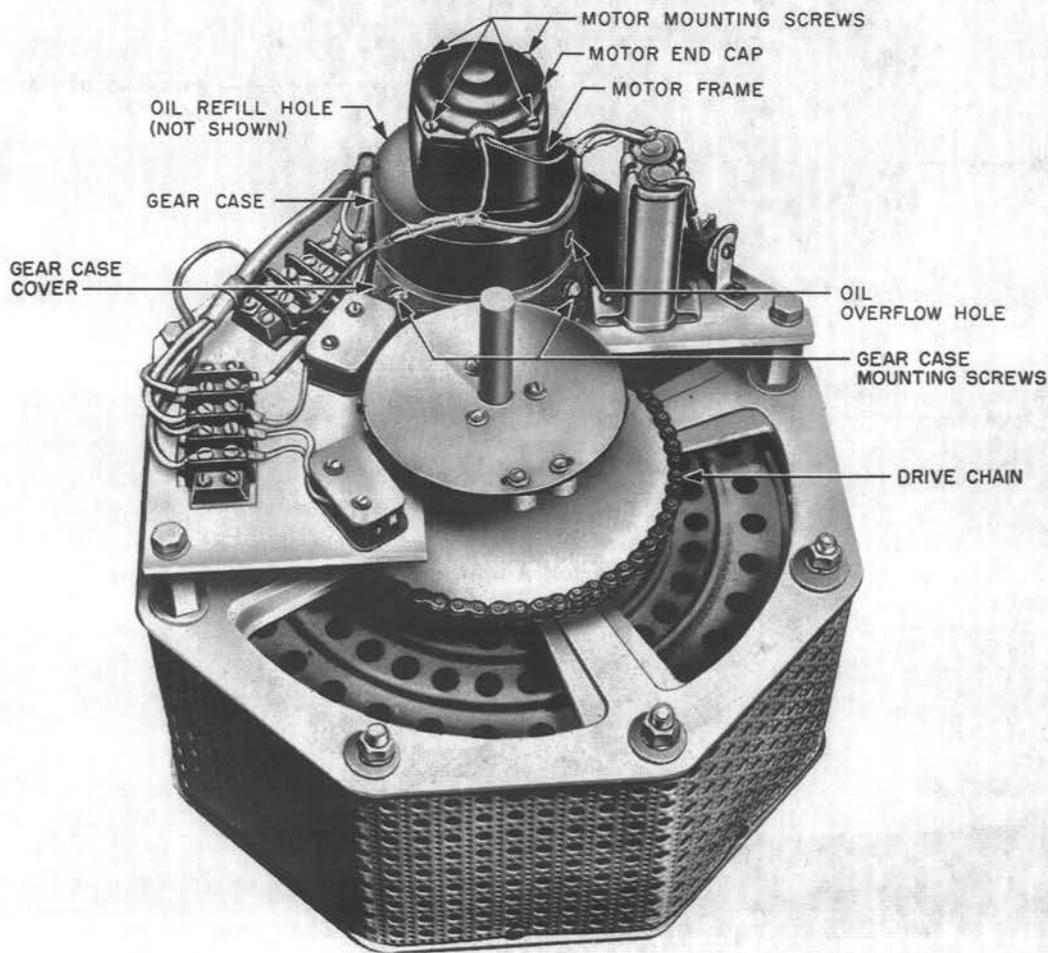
KS-15583 and KS-15684 Autotransformers Equipped With Holtzer-Cabot Motor and Gear Case
